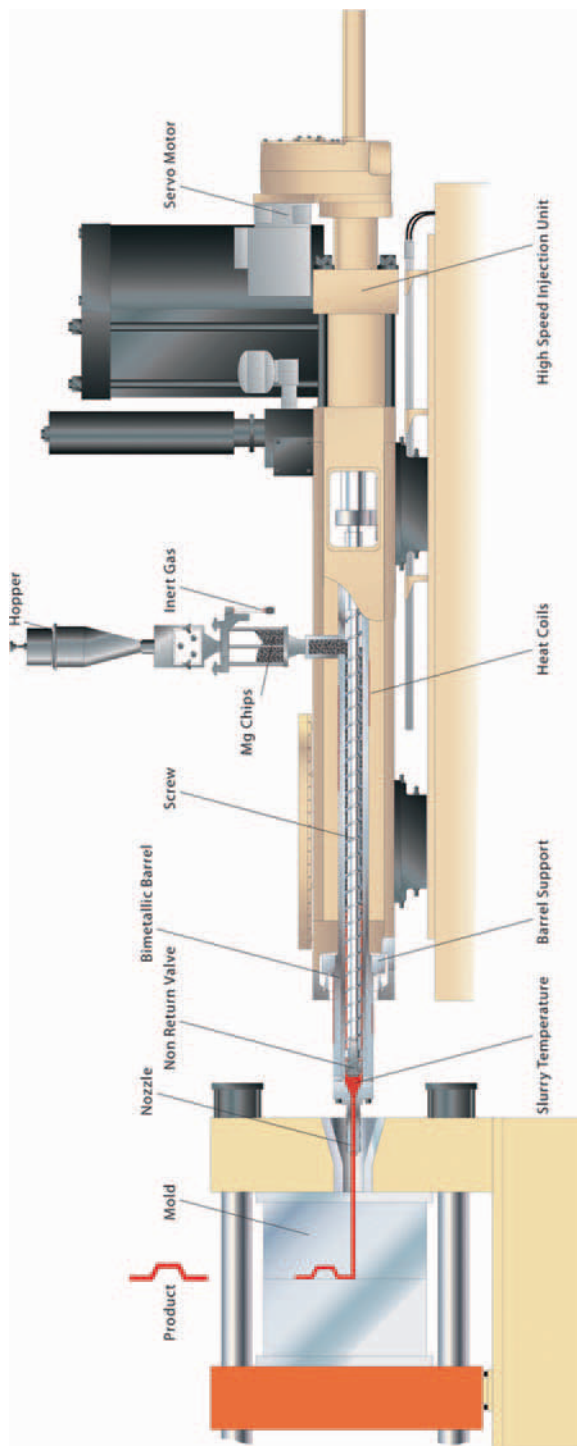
The injection unit of the magnesium molding machine with indicated major components
